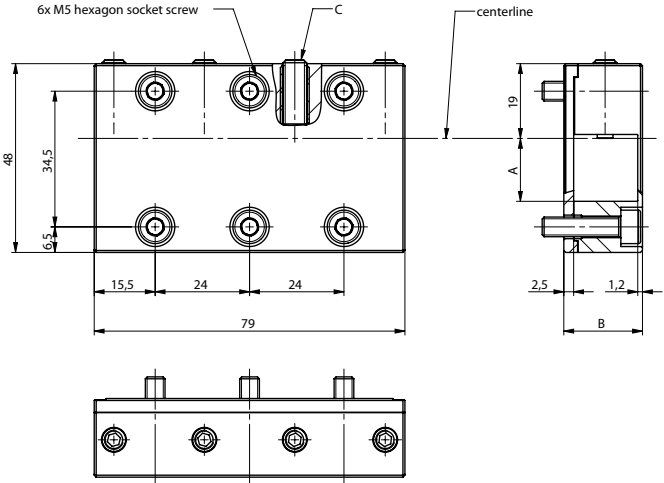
Tool holder for lathe chisel for axially mounted dynamometer,
